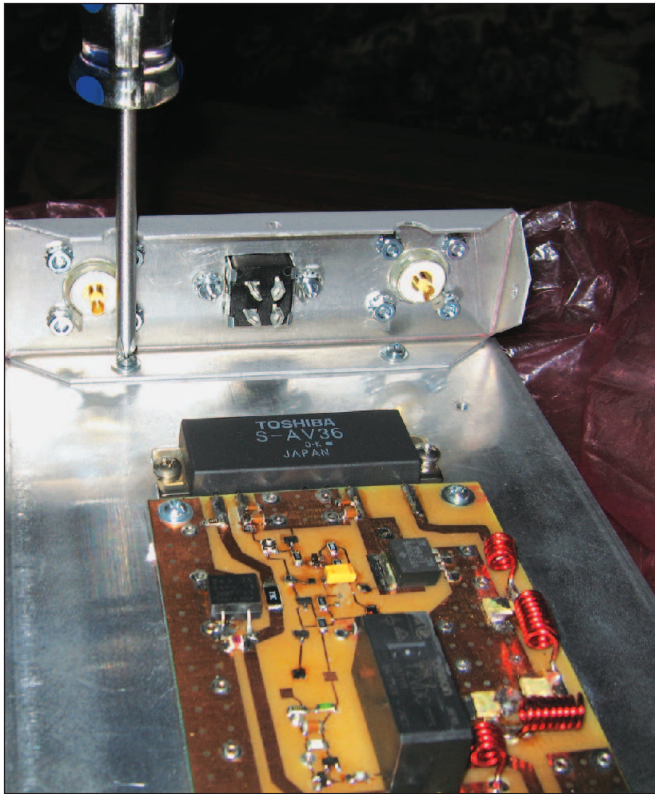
The rear panel is attached using #6-32 machine screws. The module connections are soldered to the PC board as shown.
